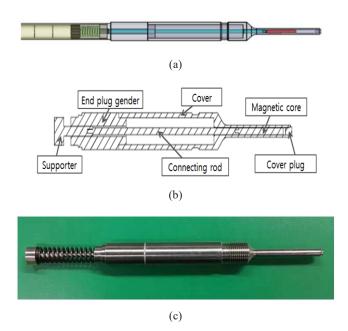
Upper part of mock-up fuel rod with LVDT core (a) Schematic diagram, (b) Composition, (c) Assembled LVDT core
